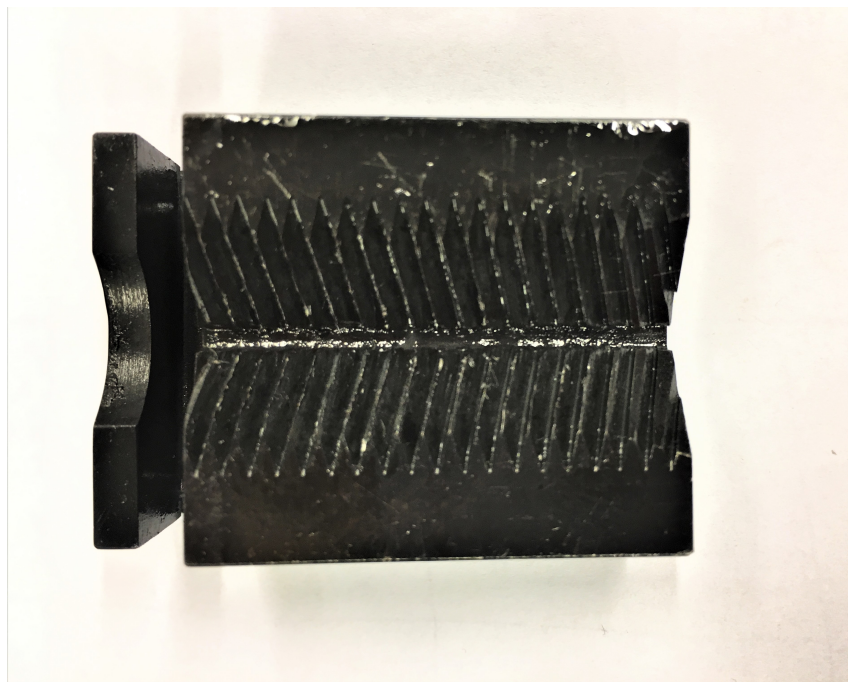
Image of one of the sides of the grip used to grip the pins in the test machine.
